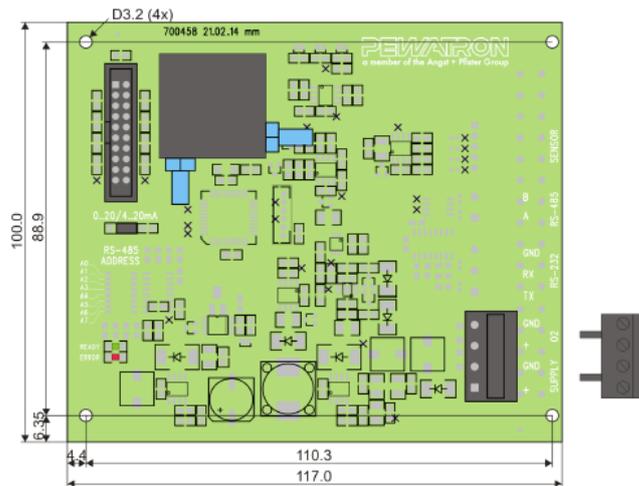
PCB electronic layout for FCX-MCxx-FLOW modules
